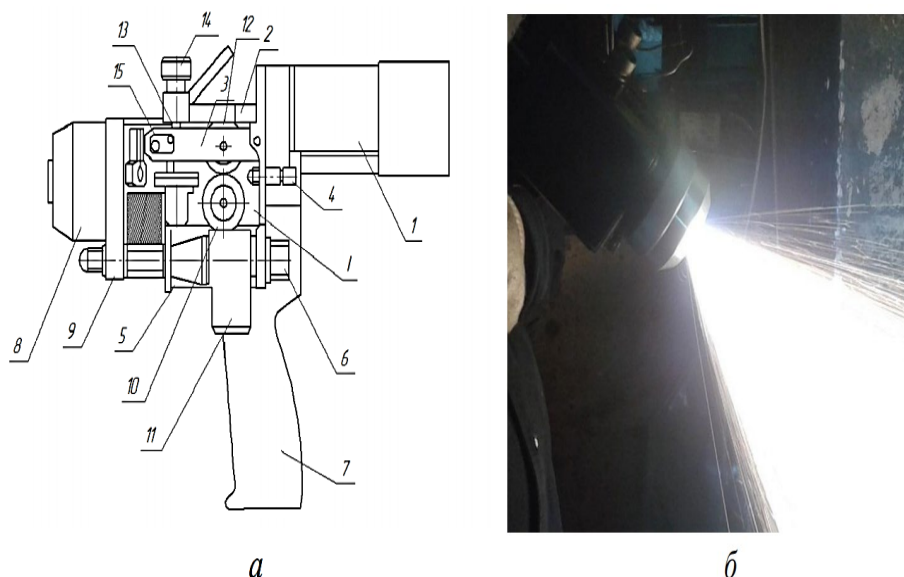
General view of the metallizer: a - metallizer device; b - installation in operation; worm reducer - 1; electric motor - 1; bracket of the mechanism of pressing of rollers - 2; levers - 3; front and rear guides - 4; crankcase tray - 5; power lines - 6; handle - 7; spray head - 8; plate - 9; feed rollers - 10; crane - 11; clamping rollers - 12; springs - 13; nuts - 14; levers - 15 [10].
